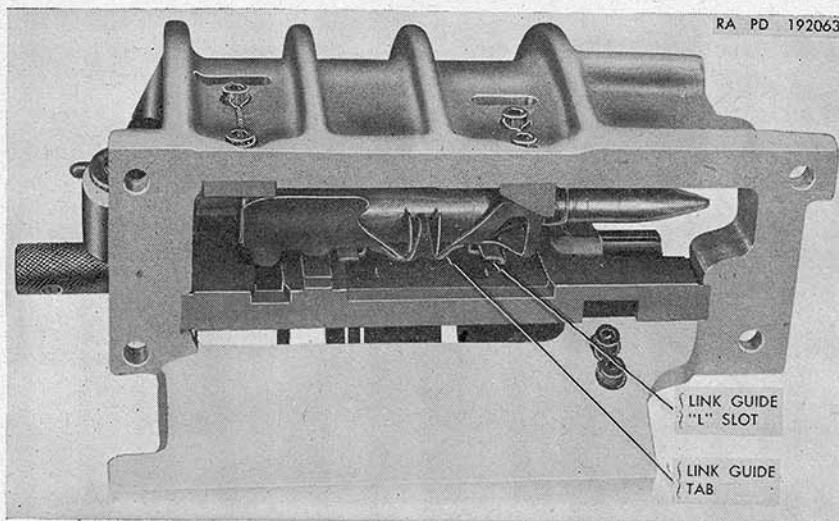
Round properly positioned in feed mouth of feeder assembly—right-hand feed.
